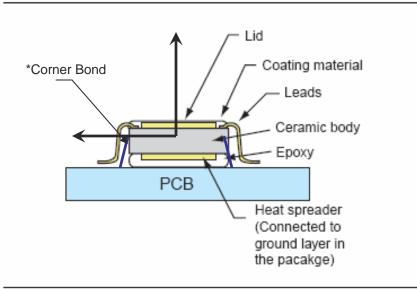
• Top Coating and Bottom Epoxy on CQ Package with Heat Sink on the Bottom
